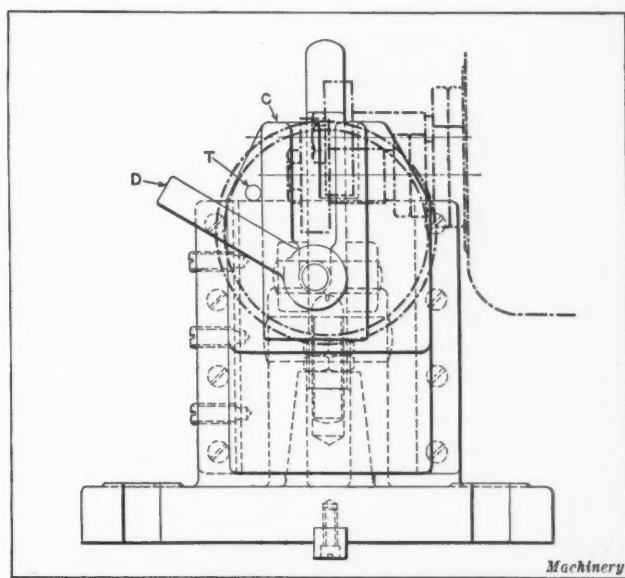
End View of Fixture illustrated in Fig. 5, showing Clamping Arrangement
